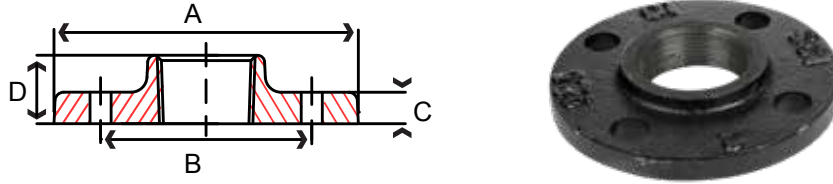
TH1 & 18TH1 – 150 lb. Threaded Companion Flange
